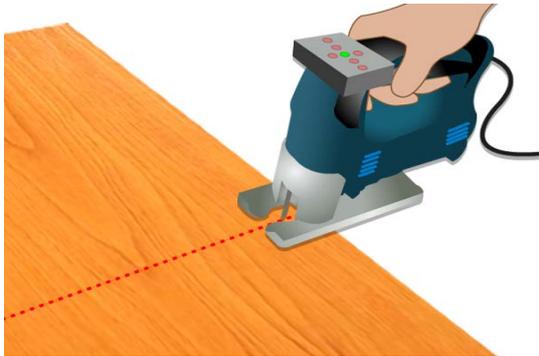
SMART attached on the Jigsaw handle that is to be cut along the template marked red line.
